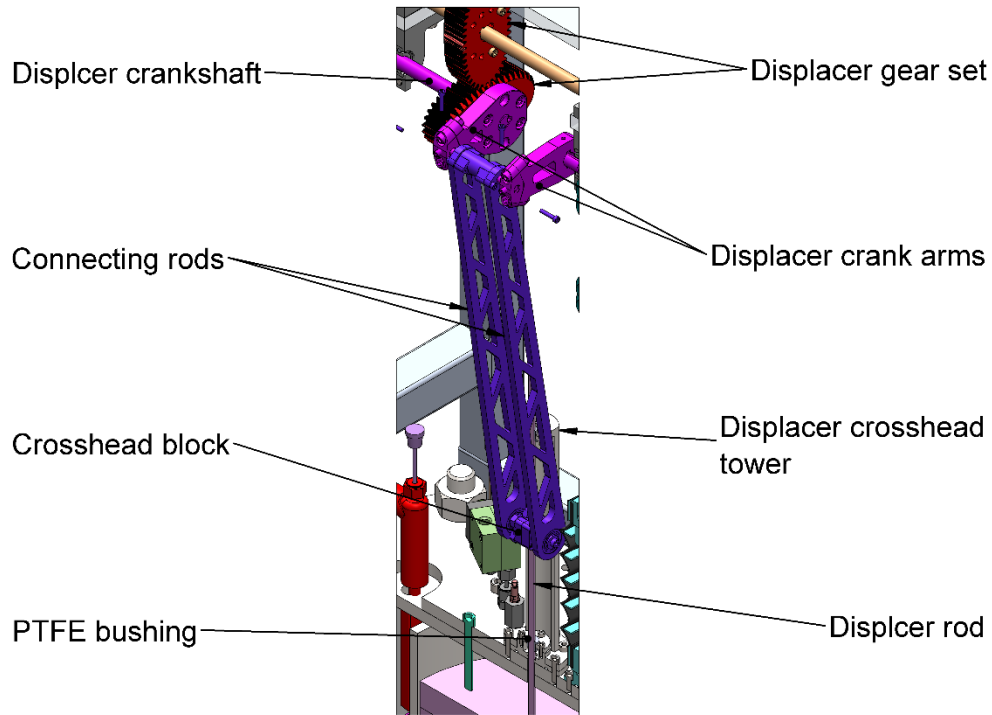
Displacer crosshead, connecting rods, and piston crankshaft
